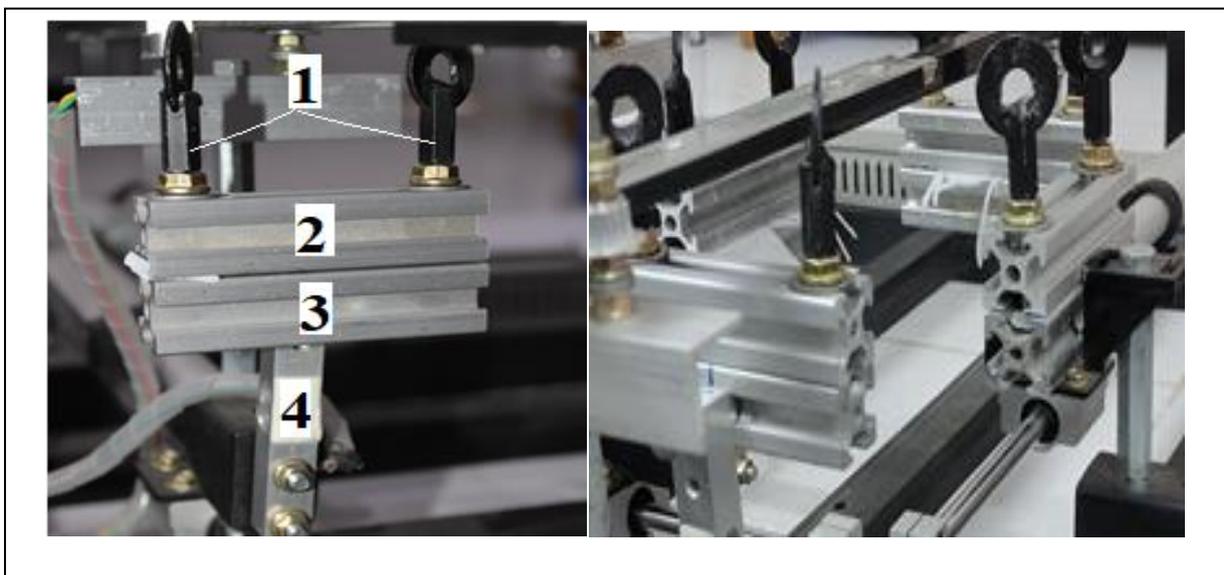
Manufactured grippers which consists of a screw (1), upper part (2), lower part (3), and the load cell (4).
